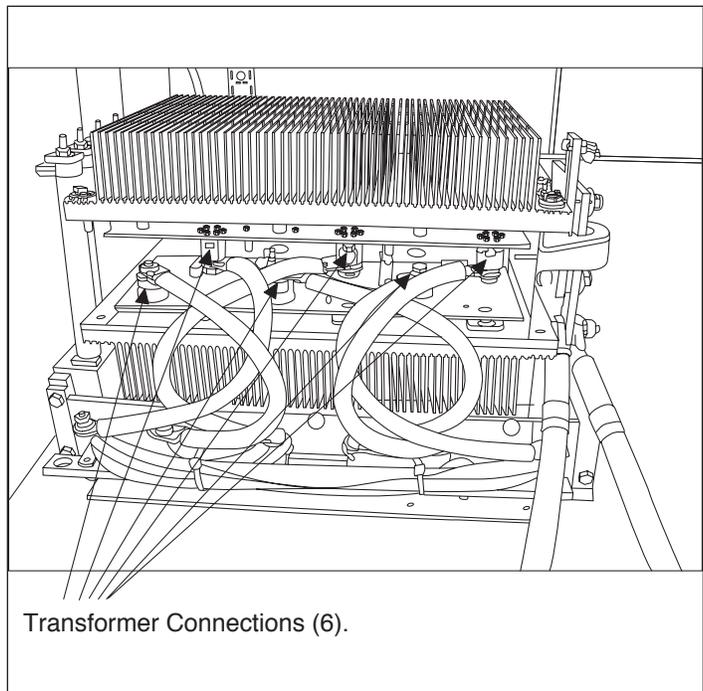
RECTIFIER RESISTANCE CHECK
